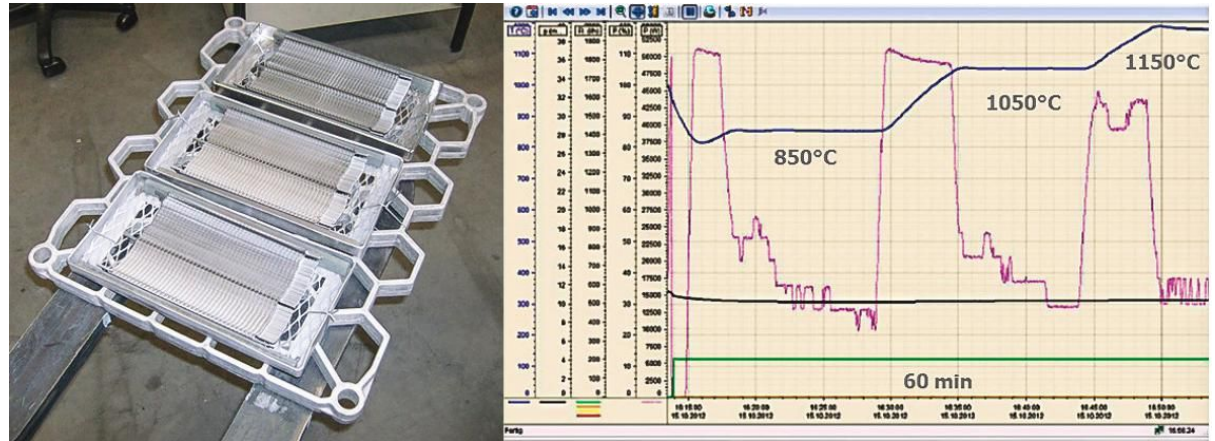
Hardening of high-speed-steel saw blades (courtesy of ALD-Holcroft)
